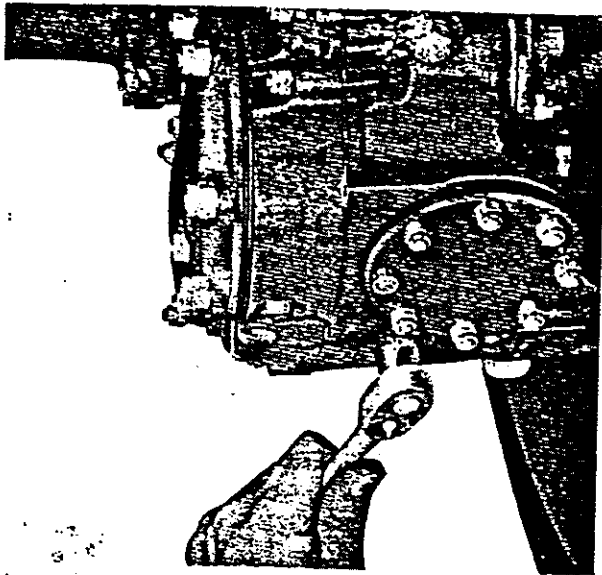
Removing Accessory Drive Gearbox Shouldered Bolt
